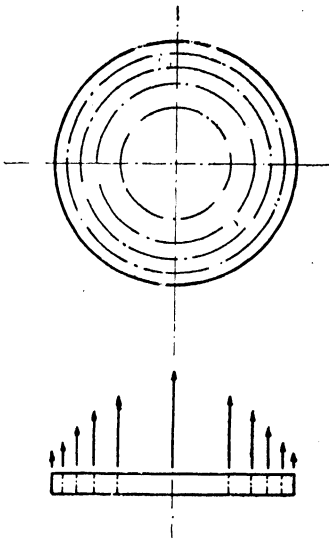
RESISTANCE TO SIDE EXPANSION CAUSING A PYRAMIDING OF SQUEEZING PRESSURE IN THIN METAL
